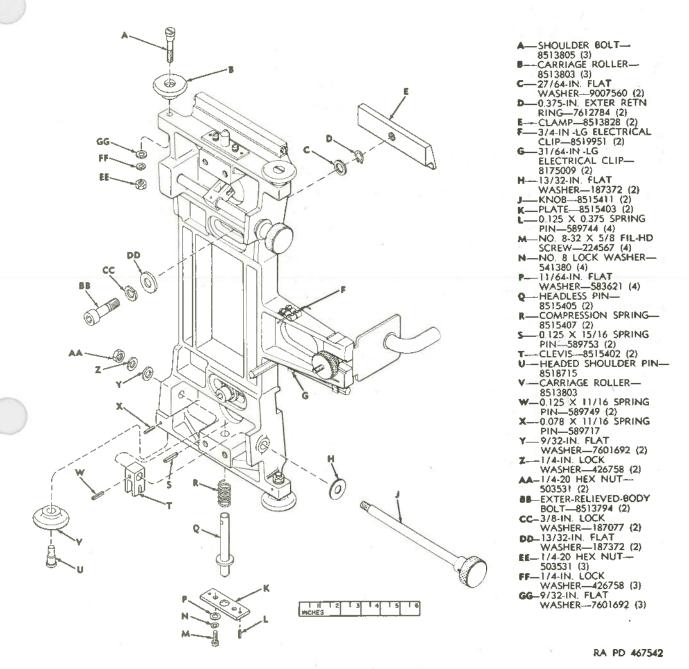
Magnetron carriage assembly 8513913—partially exploded view.
